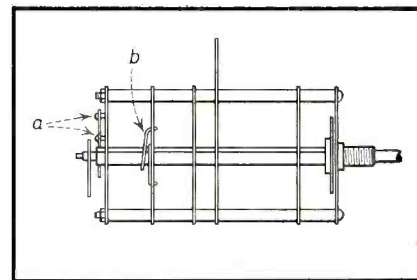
Partial drawing of Motorola 50, 51, 52 tuners—eliminating fading drift and general noise. Points a and b indicate points of lubrication. Flux and solder rivets for best results.
